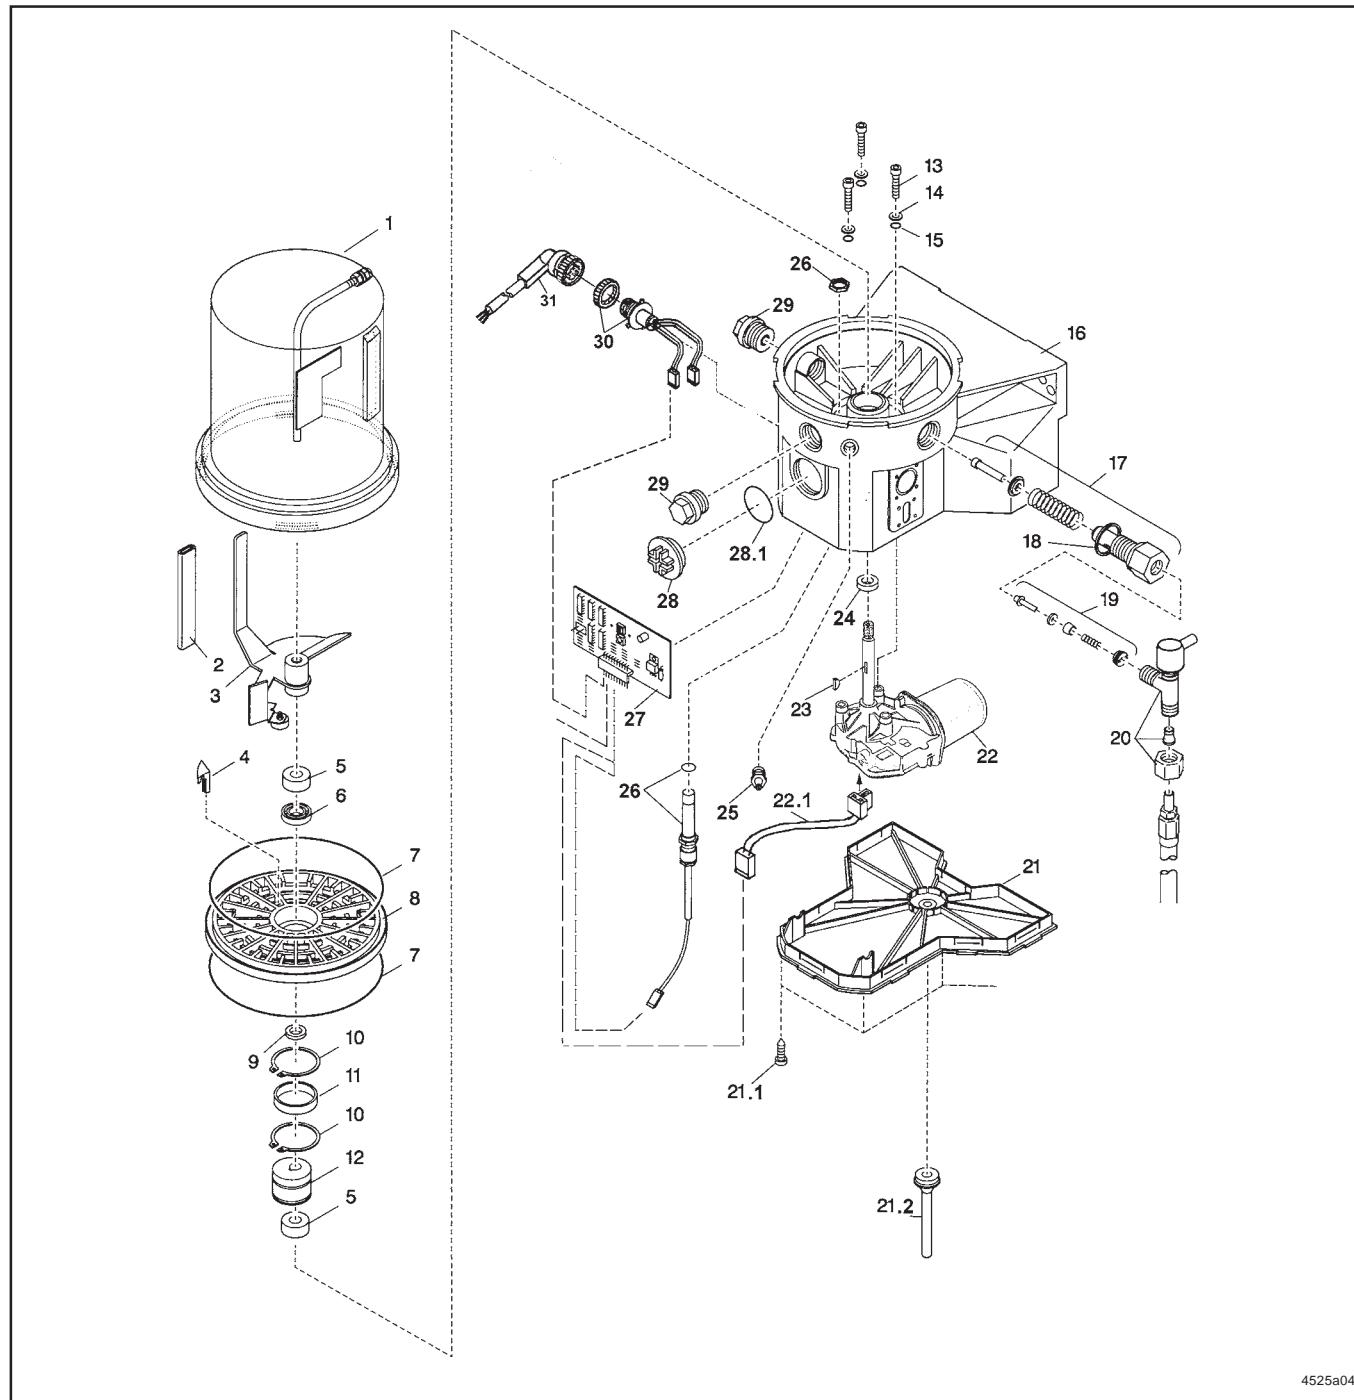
Explosion view for P 203 -2XL-K.-12/24-1A7.16 V 10 - V13, V20 - V23
